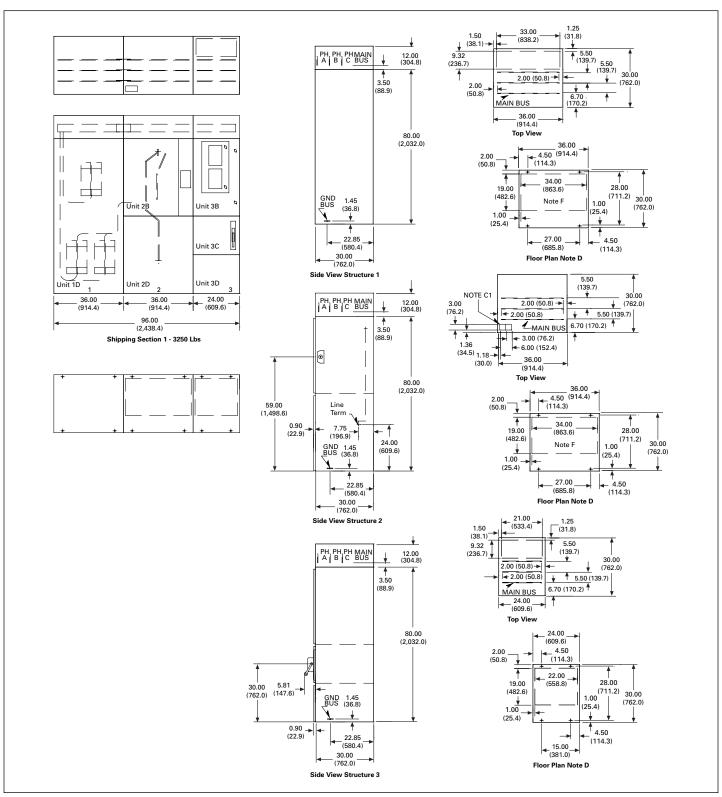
Incoming LBS, Bottom Entry, 600E/750E/1100E/1350E Fused with Metering Section—Dimensions in Inches (mm)
